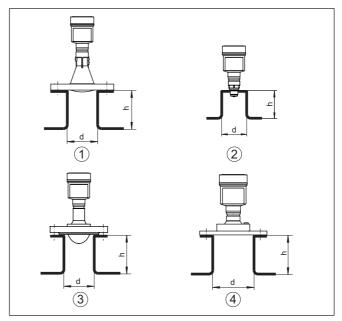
Socket mounting with deviating socket dimensions with different versions of VEGAPULS 6X
